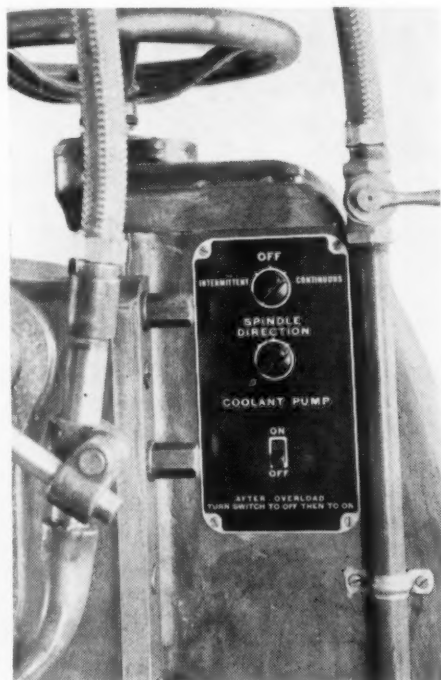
MILLING-MACHINE SETUP SWITCHES AND COOLANT-PUMP CONTROL
